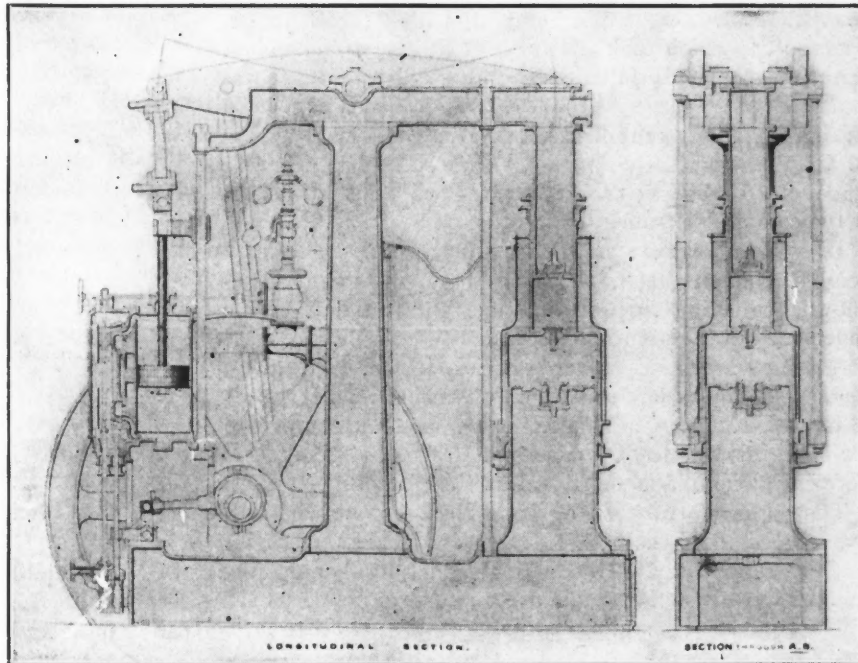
LONGITUDINAL AND CROSS-SECTIONS OF PUMPING PLANT
